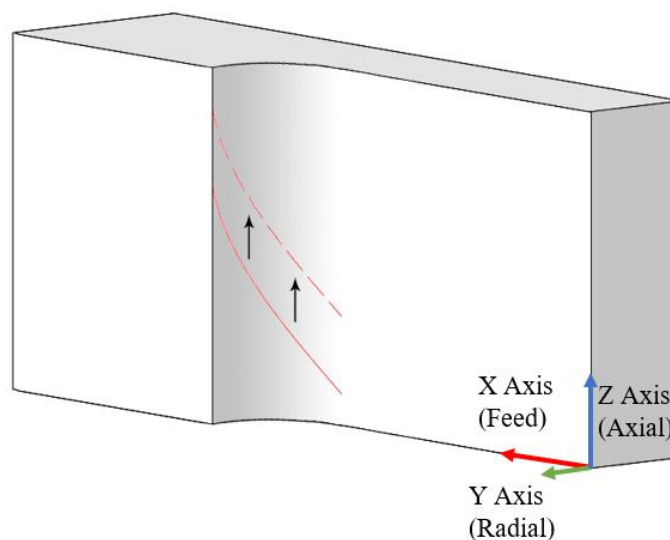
Visualization of contact arc (in red) between cutter tooth and workpiece
